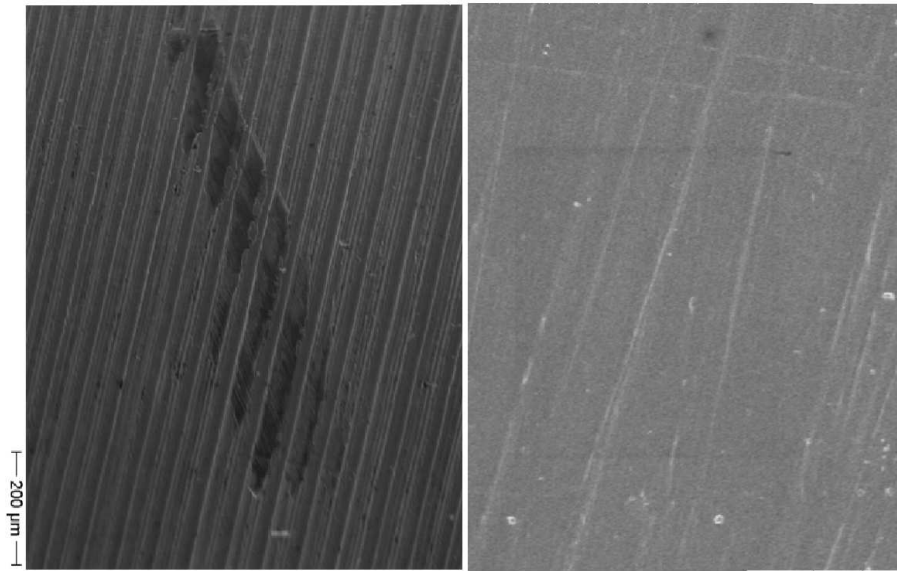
REM-photographs of electrode surfaces with different surface finishing. Left: Electrode surface which was gold-plated directly after machining. The grooves are caused by the machining tool. The black stain is a not adequately gold-plated area of copper. Right: Surface which was polished before gold plating. The surface is continuously gold plated.
